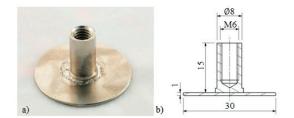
a) Tested standard insert b) Dimensions of the tested inserts
